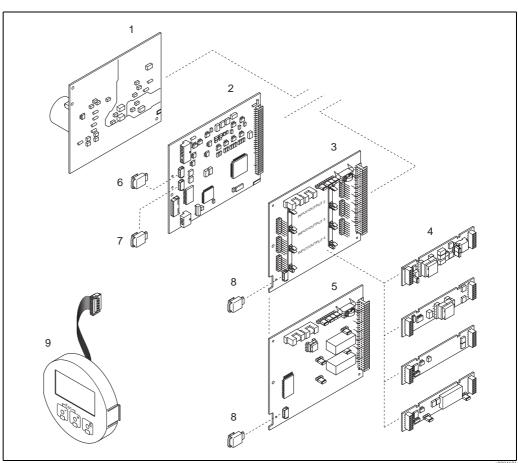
Spare parts for transmitter 83 (field and wall-mount housings)
